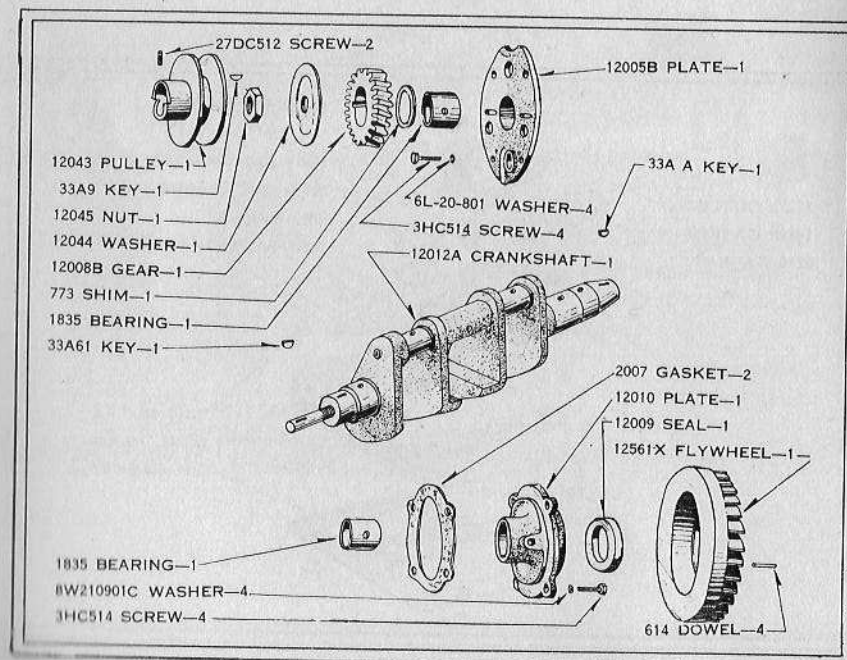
CRANKSHAFT AND FLYWHEEL GROUP
